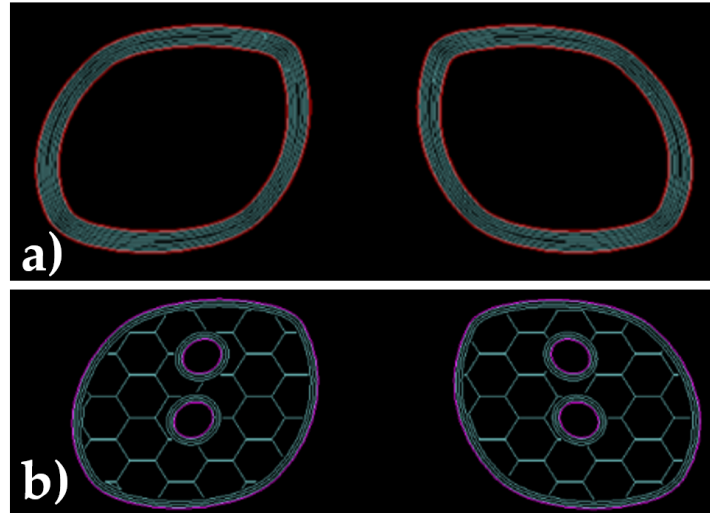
Intake mandrel geometry: a) Hollow intake; b) Honeycomb intake. Mandrel cross section.
